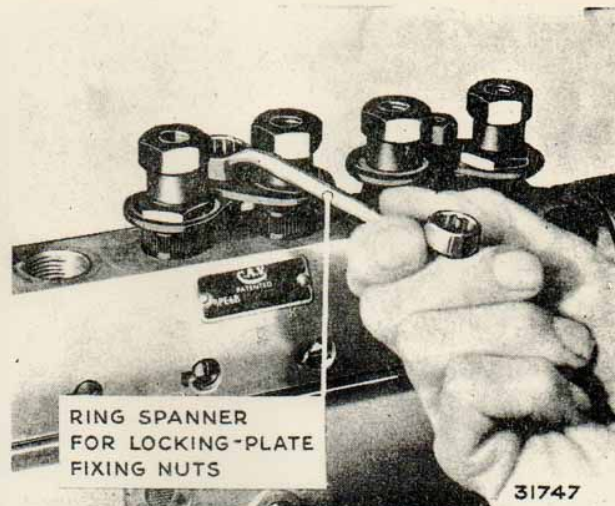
REMOVING DELIVERY VALVE LOCKING PLATES.
